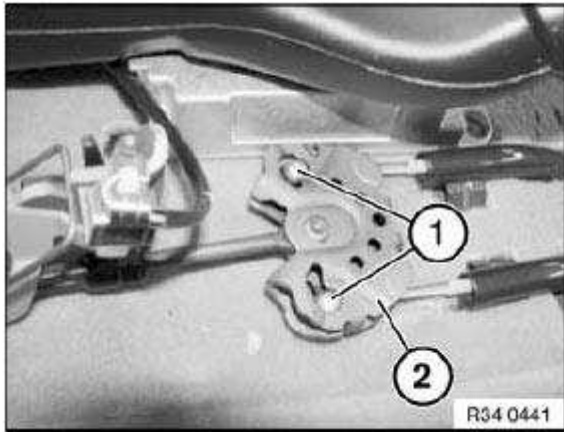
Guide Handbrake Bowden Cables And Balance Bar
